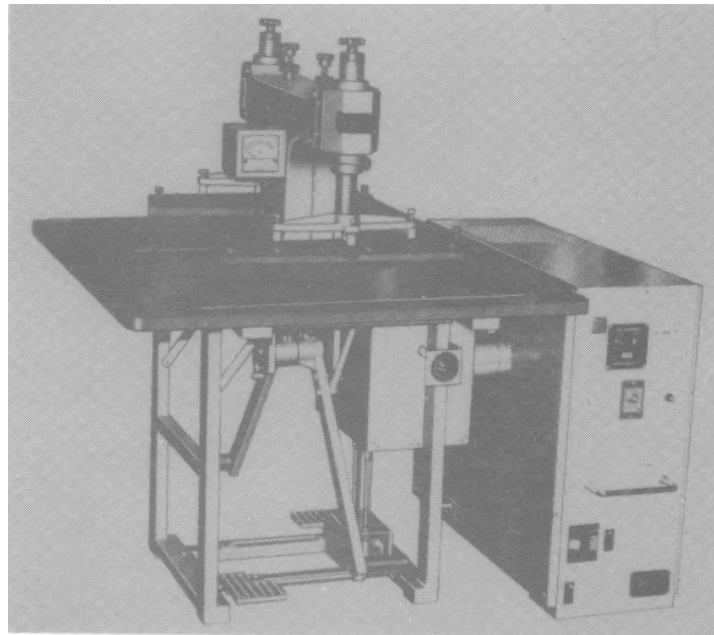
"Sewing Machine" Dielectric Welder (Bar Welder).
